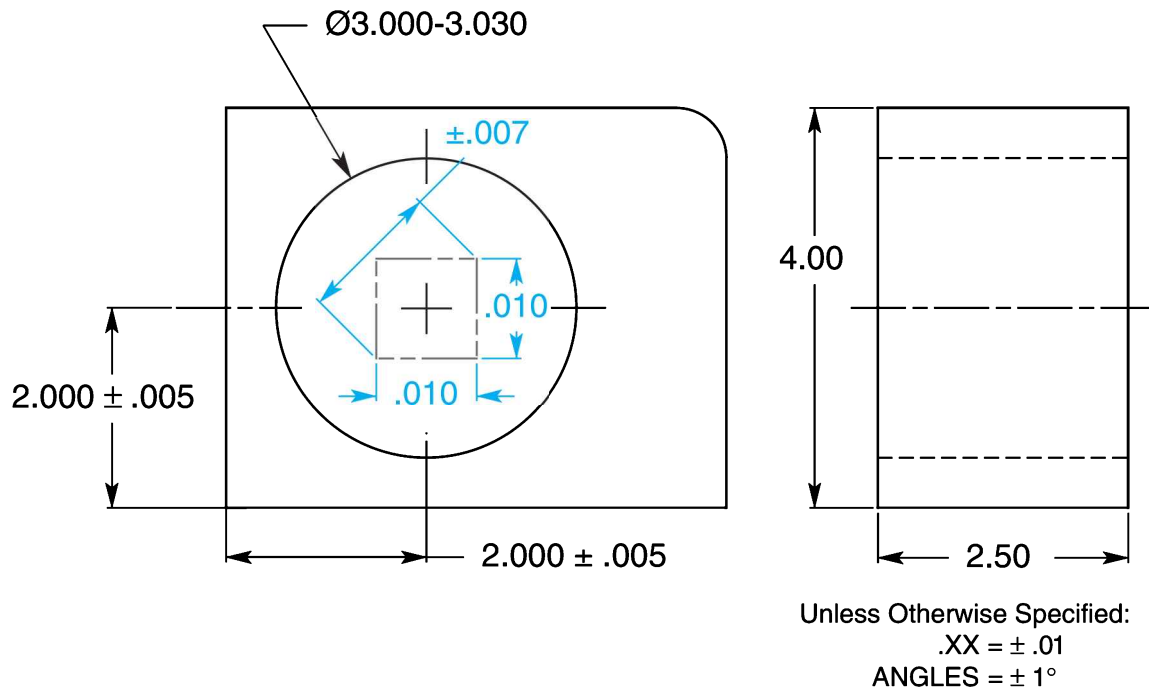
The traditional plus or minus tolerancing system. The axis of the 3-inch-diameter hole, to be in tolerance, must fall inside of the .010 square tolerance zone.
